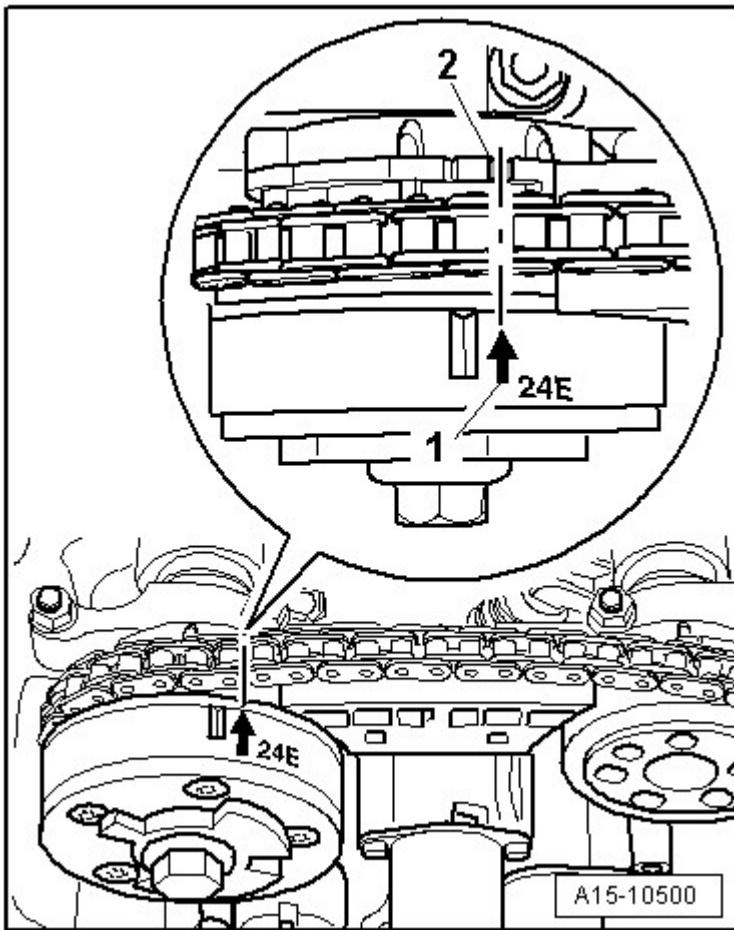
Verifying Installation Marks Of Intake Camshaft Adjuster With Marks On Control Housing
